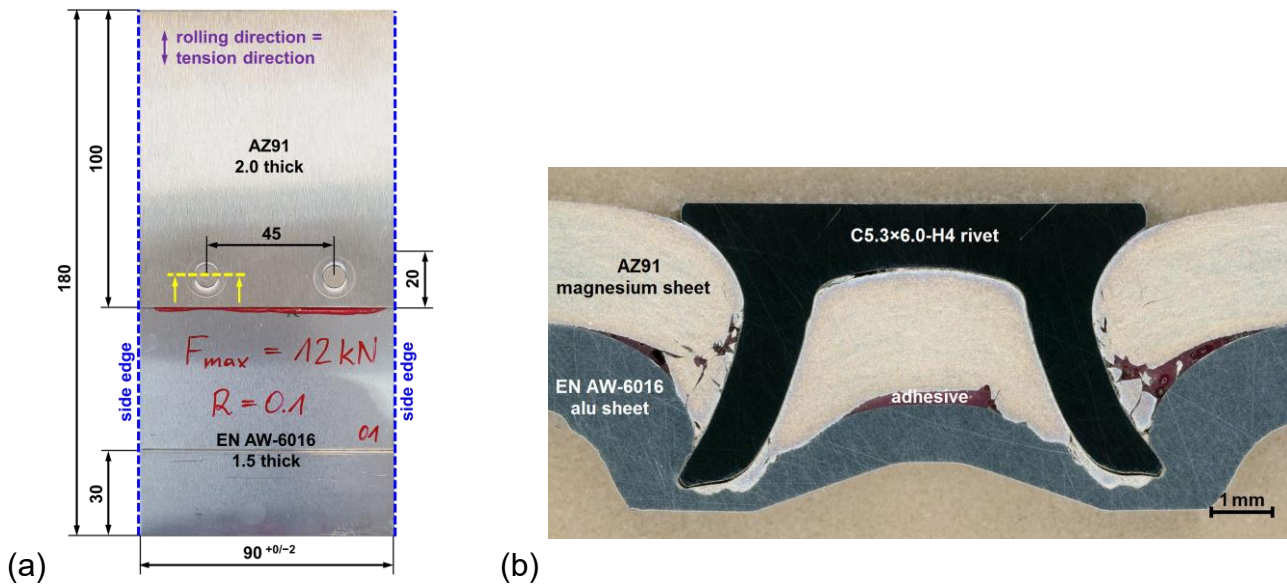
(a) Sample dimensions and (b) typical cross-section of hybrid aluminum-magnesium joint
